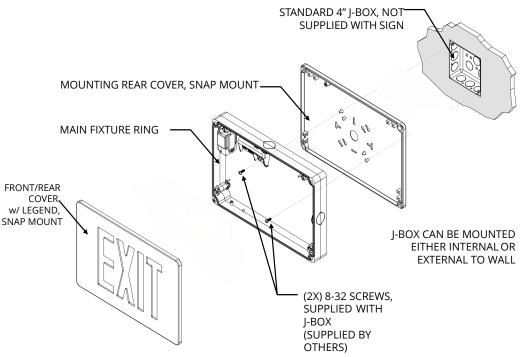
BACK MOUNT ASSEMBLY (SINGLE FACE)
